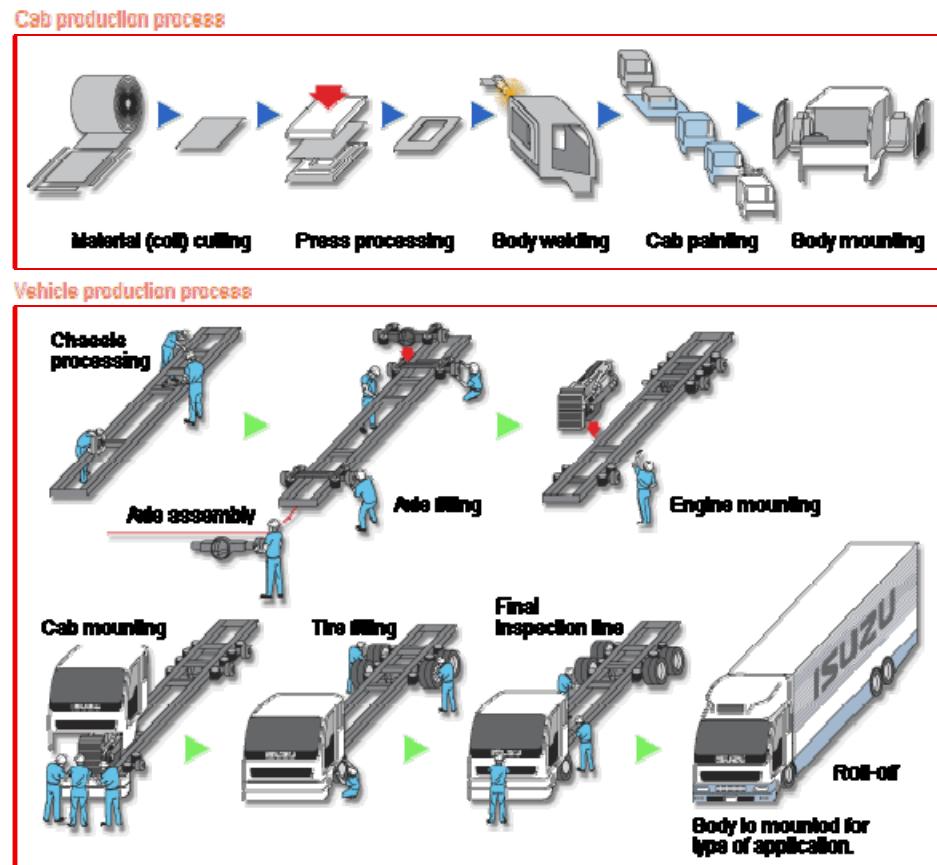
Isuzu N-Series Truck General Assembly Process
